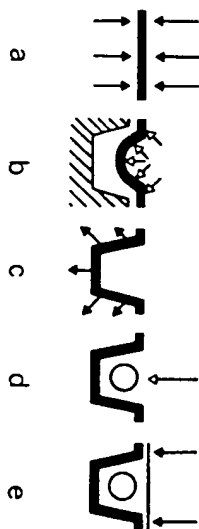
The steps in making thermoforms. (a) Heating; (b) forming; (c) cooling; (d) filling; (e) sealing.
